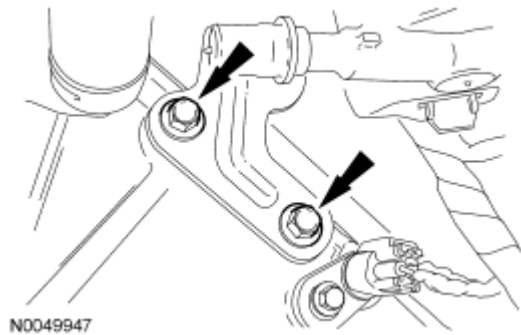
Locating Power Steering Reservoir Bracket Bolts
